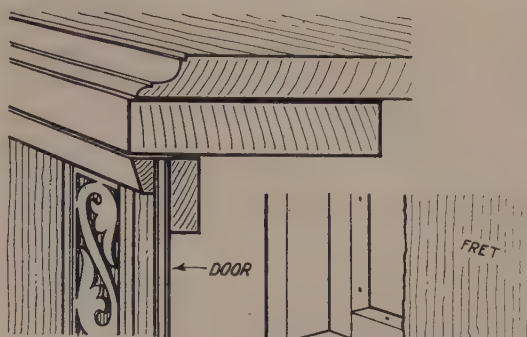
SECTION THROUGH TOP AND DETAIL OF DOOR.
